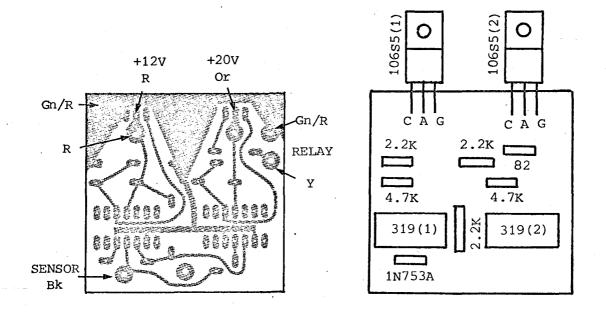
Component arrangement of the board shown in Fig. 12a.
